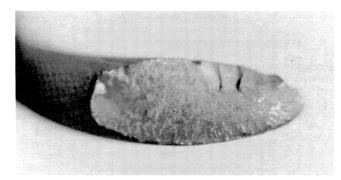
Large Diameter Relief Valve Spring Failed in Fatigue Initiating at a Rolling Lap Shown at the Center Top of the Photograph.
